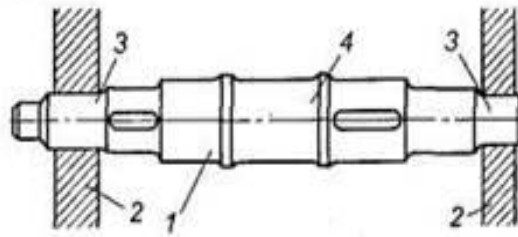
Straight shaft: 1 - shaft; 2 - shaft supports; 3 - spikes; 4 – neck
